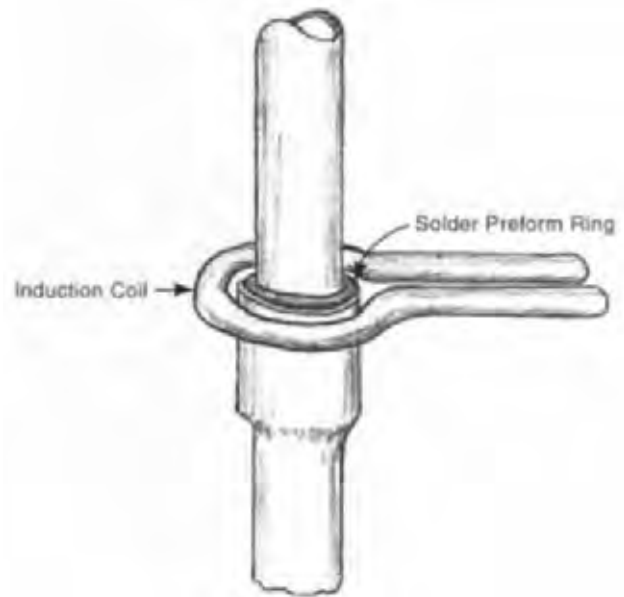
A2h Arrangement for induction heating to melt a solder preform in the joining of two pieces of metal tubing.
